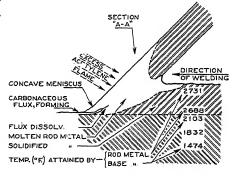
Sketch indicating metallurgical factors in the Lindeweld process.
